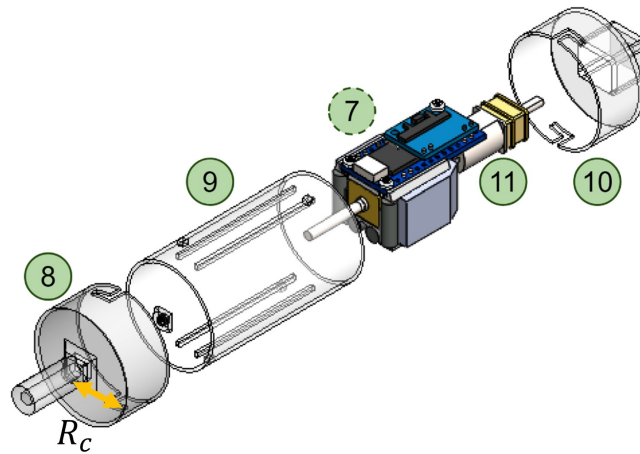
Exploded view of the robot body SOLIDWORKS model. The robot head is comprised of (7) an assembled slider located inside the head, (8) a PLA head cap, (9) a PLA shell, and (10) a PLA tail cap. (11) a DC motor actuating the tail – flagellum is embedded inside (10).
